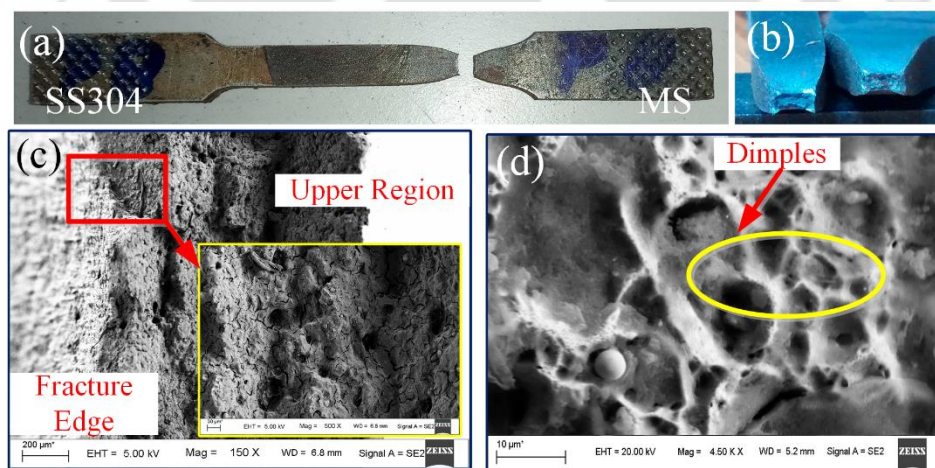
Fractured tensile specimen: (a) showing fracture location in the UNS G10080 steel base metal, (b) macro fracture appearance, (c) localized fracture morphology, and (d) presence of fine and coarse dimples at the fracture surface
